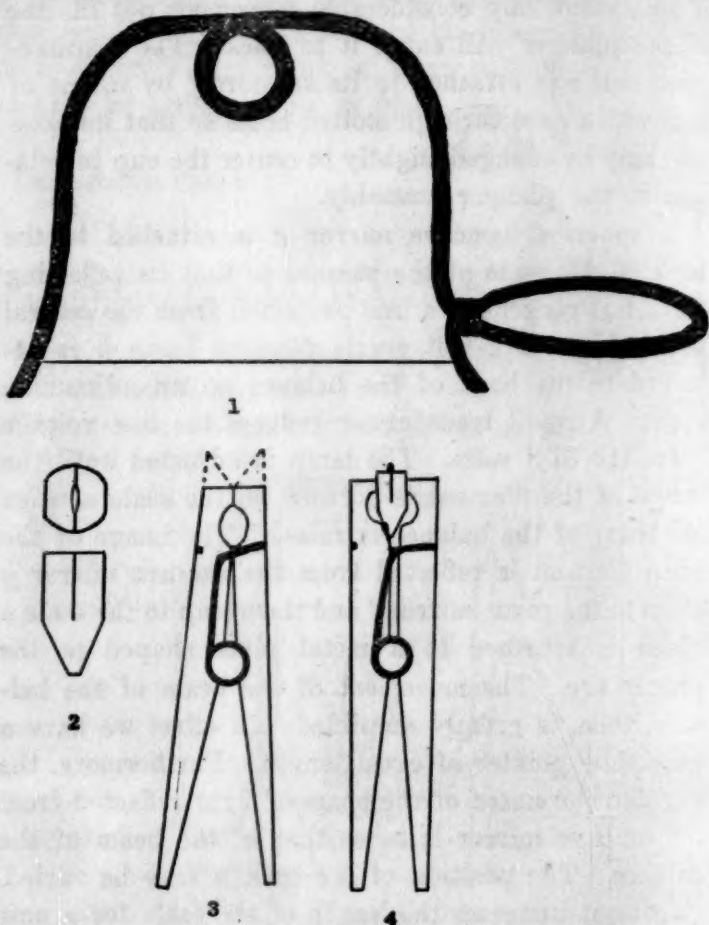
Fret saw strung with wire. 2, Cork cut to hold specimen. 3, Spring clothes pin with ends cut off as shown by dotted line. 4, Clothes pin, cork with specimen in place to cut.
